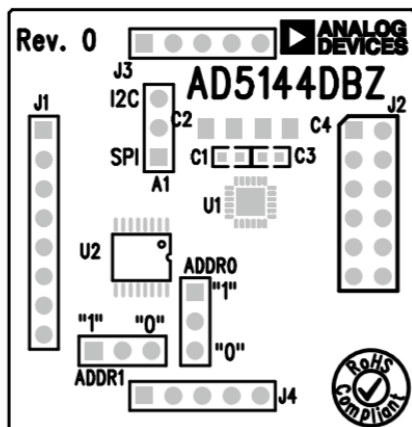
AD5144 Component side view of the daughter board and component placement drawing of daughter board. [5]
